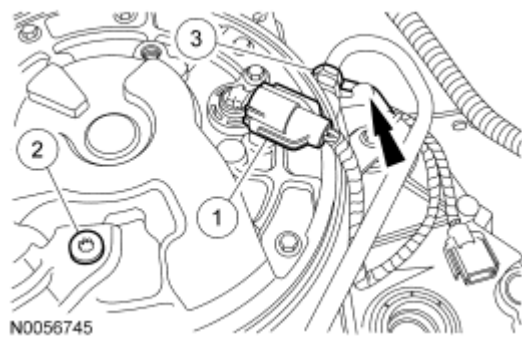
Identifying Retainers, Bolt And Fluid Cooler Tube
